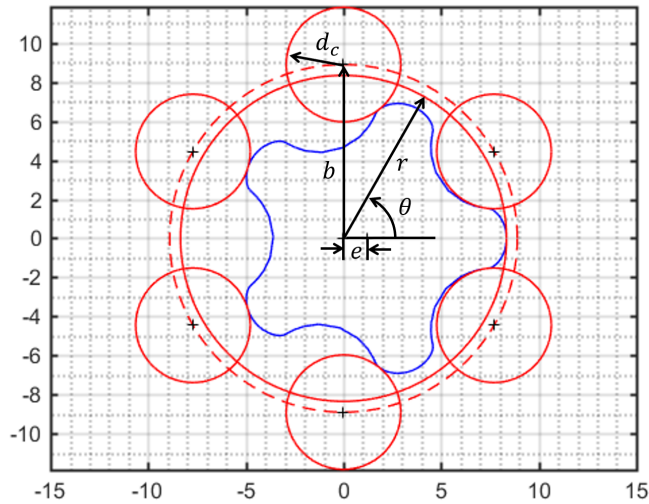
Circular-toothed gerotor gearset. Design parameters include: the distance from the center of outer rotor to the center of outer gear tooth b , the eccentricity between the inner rotor and outer rotor e , the outer gear tooth radius d_c , the outer gear “root radius” r , and the number of outer rotor gear teeth m .
